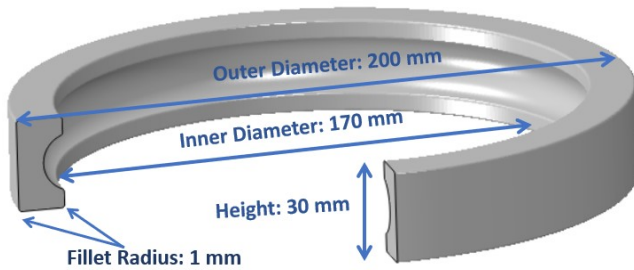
CAD model and brief dimensions of a ball bearing case used for demonstrating LPC process design carbon distribution modeling.
